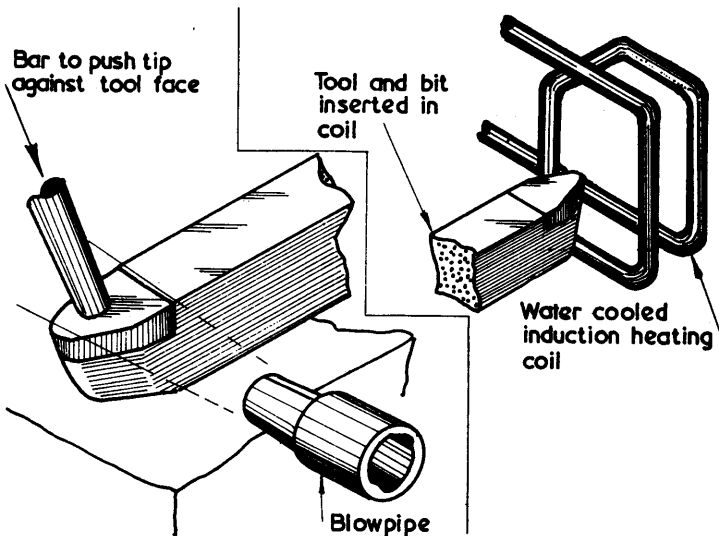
Brazing Techniques for Tipped Tools.
